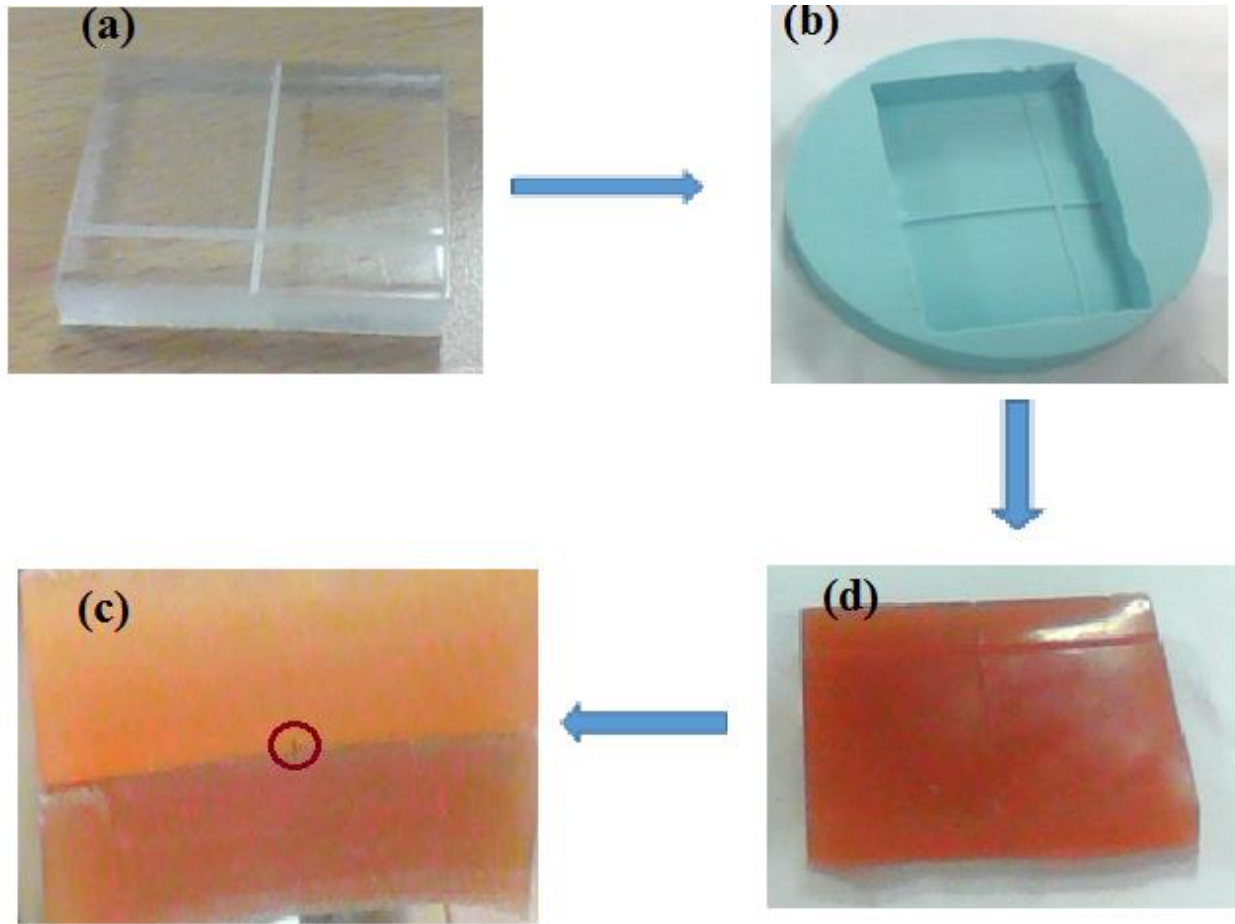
(a) Mater mold of acrylic (b) silicon mold (c) PU 744D casting (d) Two Pu744d pieces sealed together making pattern of channels
